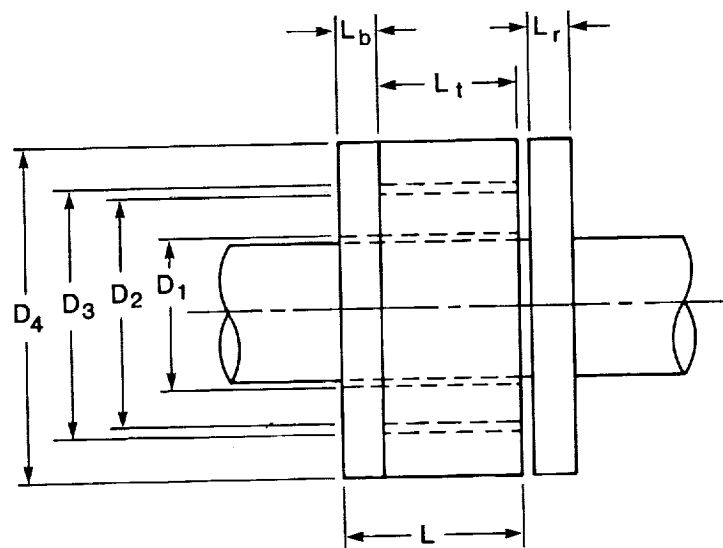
Geometry of Single Acting Magnetic Thrust Bearing
